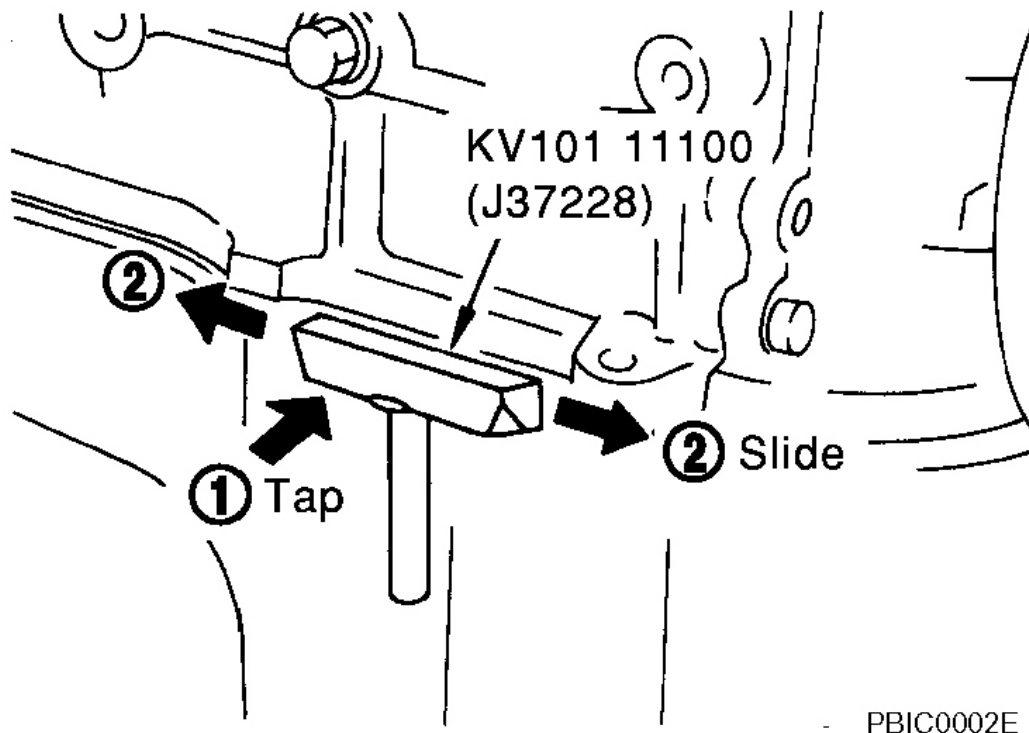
Identifying Old Liquid Gasket Sealing By Using Seal Cutter (SST)
